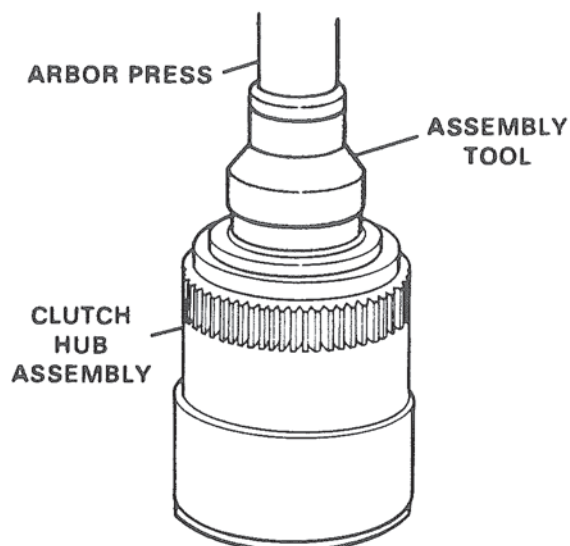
Pressing Forward Clutch Hub into Ring Gear.
